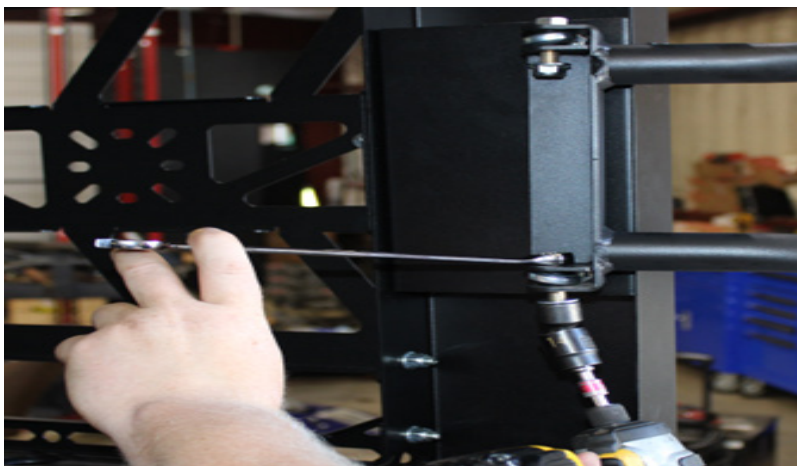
Use 9/16" Socket & 9/16" Wrench to tighten Door Mounting Bolts & 11/16" Wrench for 2 X 3/8-24" Jam Nuts (K)
